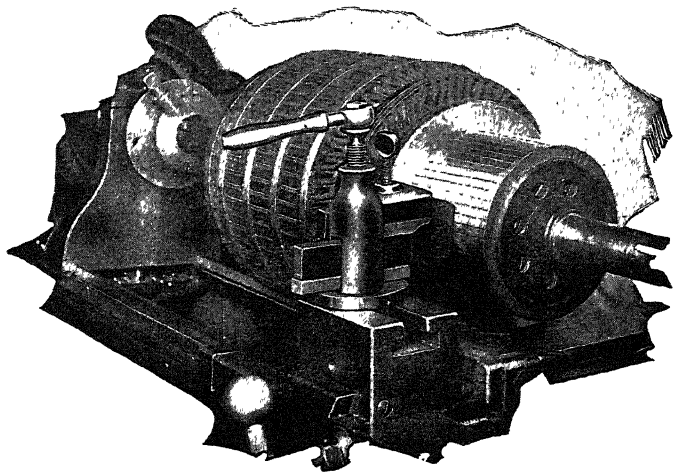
Lathe application of Cass commutator smoothing stone. Where it is necessary to remove an armature from a motor for purposes other than truing the commutator a very convenient method is to mount the Cass smoothing stone in a box tool holder made to fit the tool post of a lathe, as shown.
